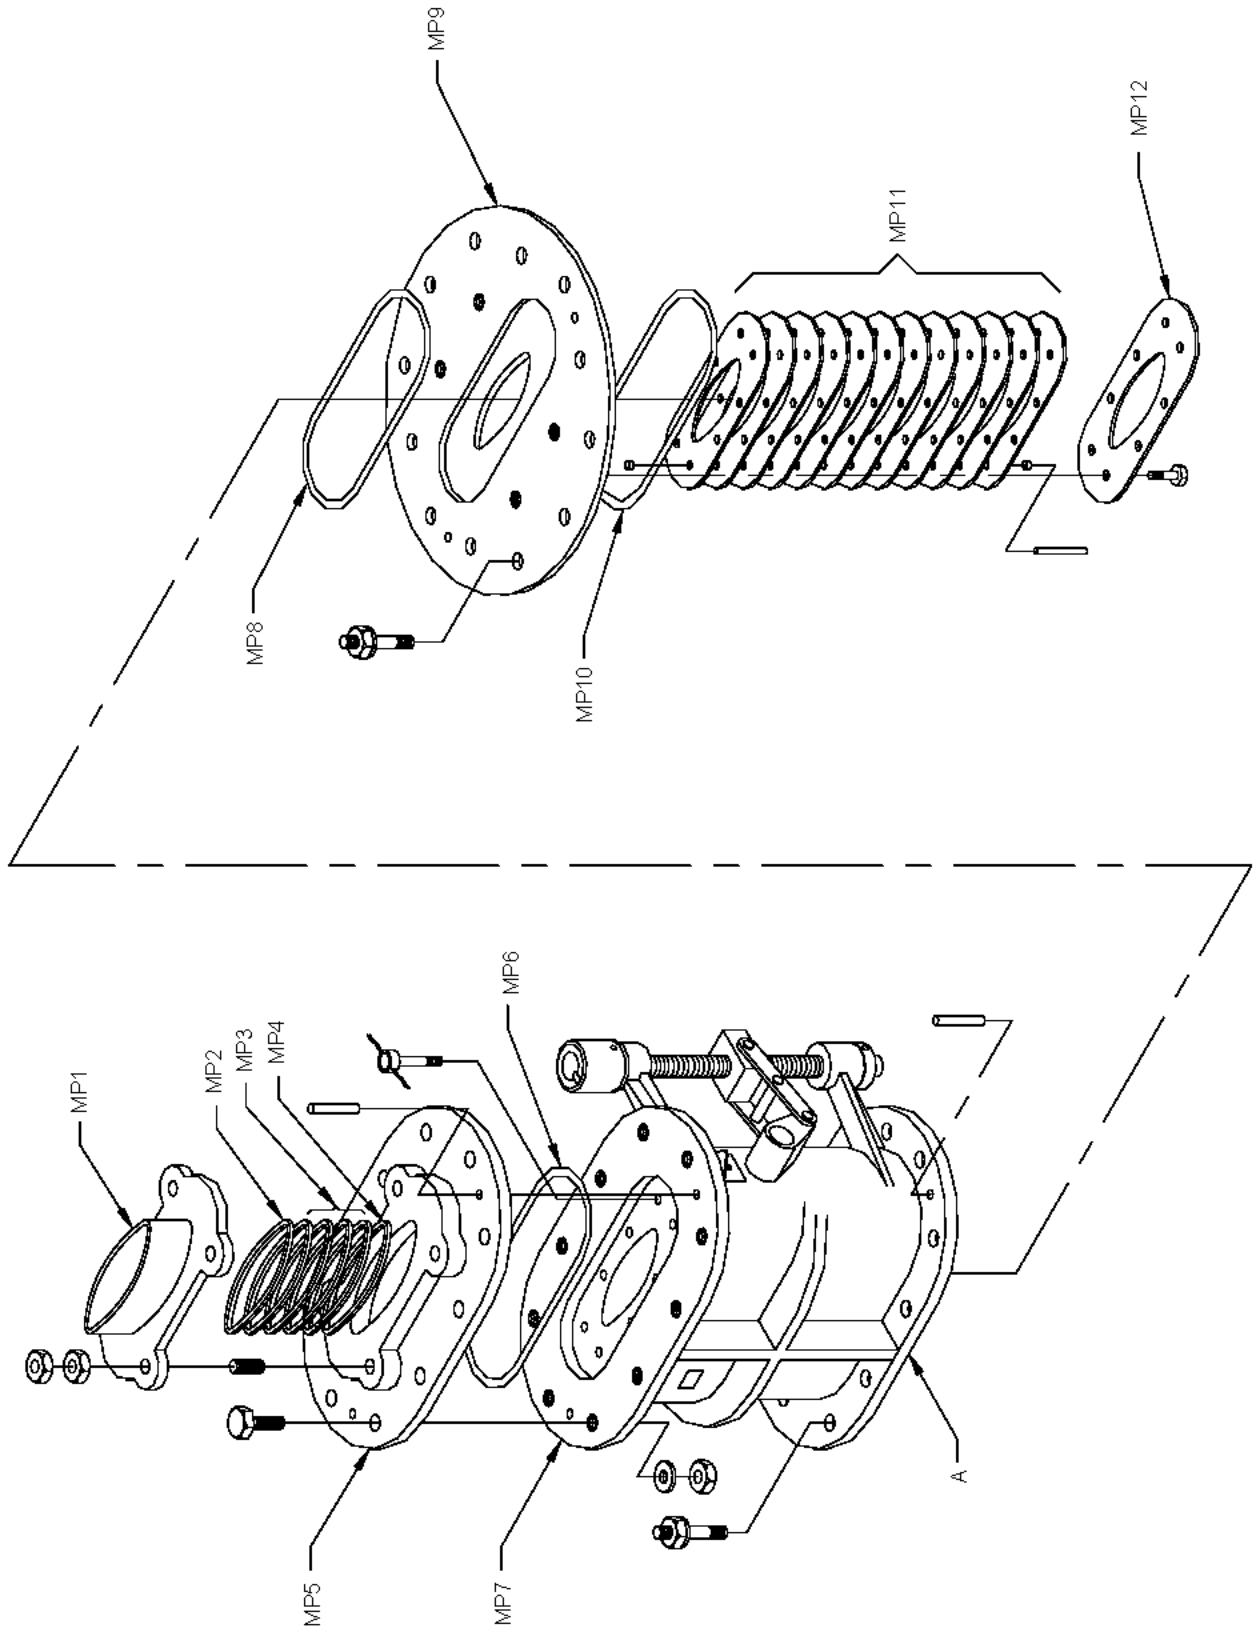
Sea Valve (Unit 2 or 7), Exploded View
